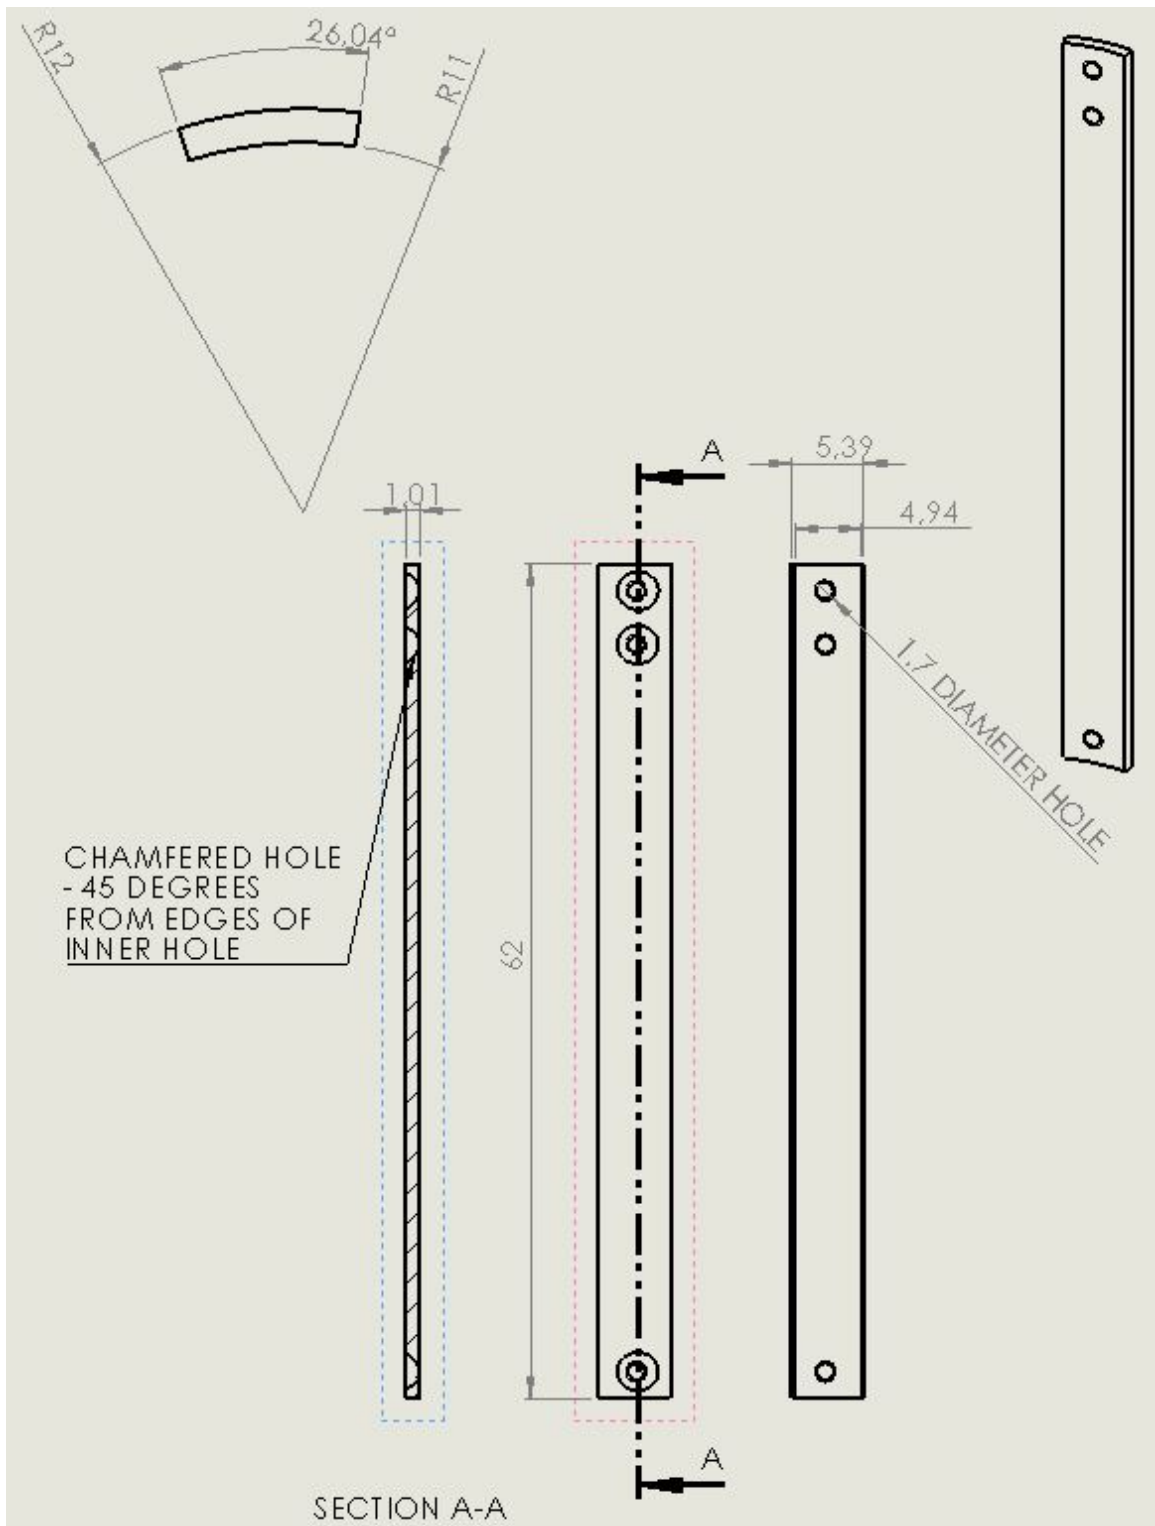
Solidworks model drawing of the outer frame bar(s) of the cryostat holder
